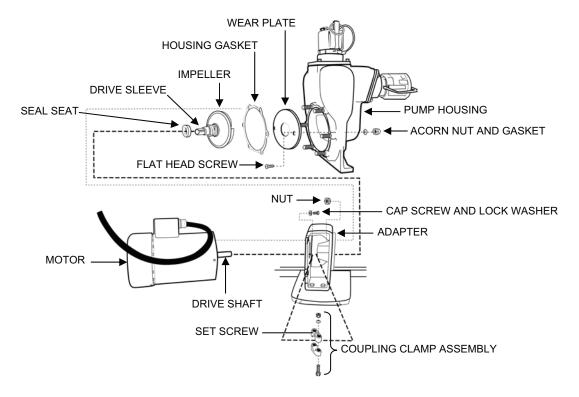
P-8 and P-7 Pump, Adapter, and Wear Plate Removal.
